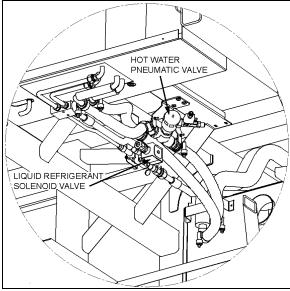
DRIVER'S EVAPORATOR LIQUID SOLENOID VALVE 22324
